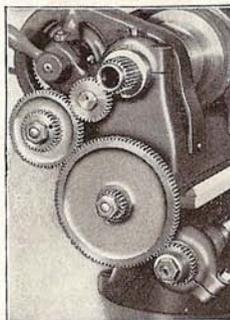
Gears Arranged to Cut Left Hand Screw Threads.
